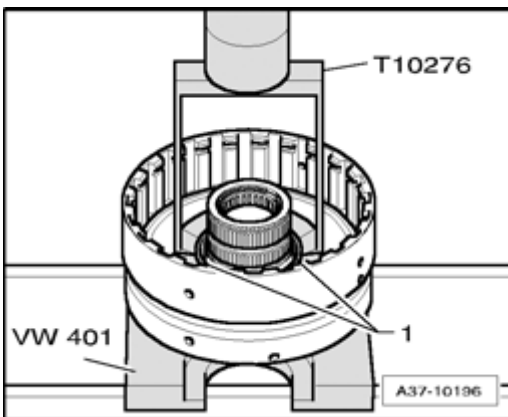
Installation Bracket T10276 And Split Retaining Ring
